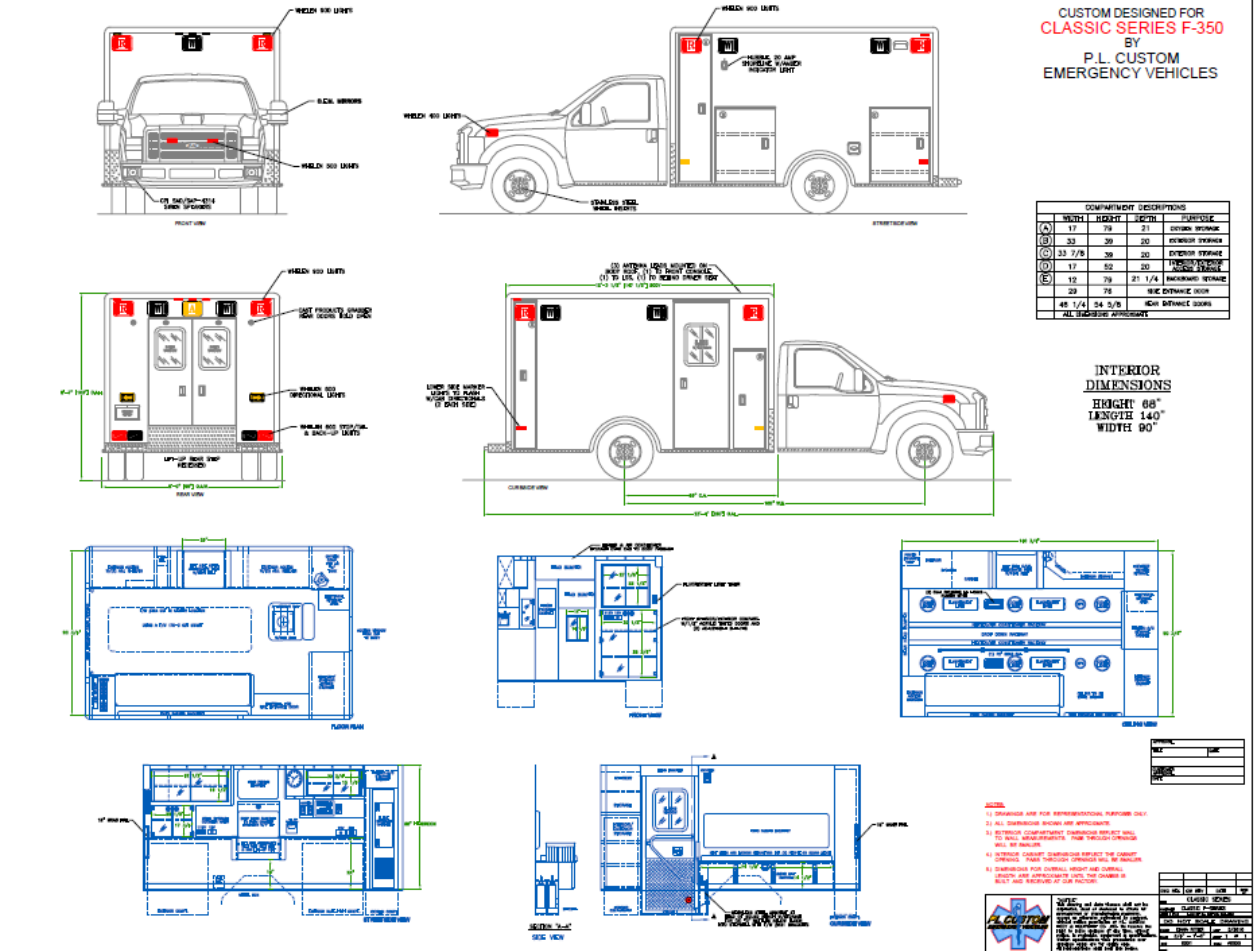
Cad Drawing of a typical PL Custom type 1 ambulance
